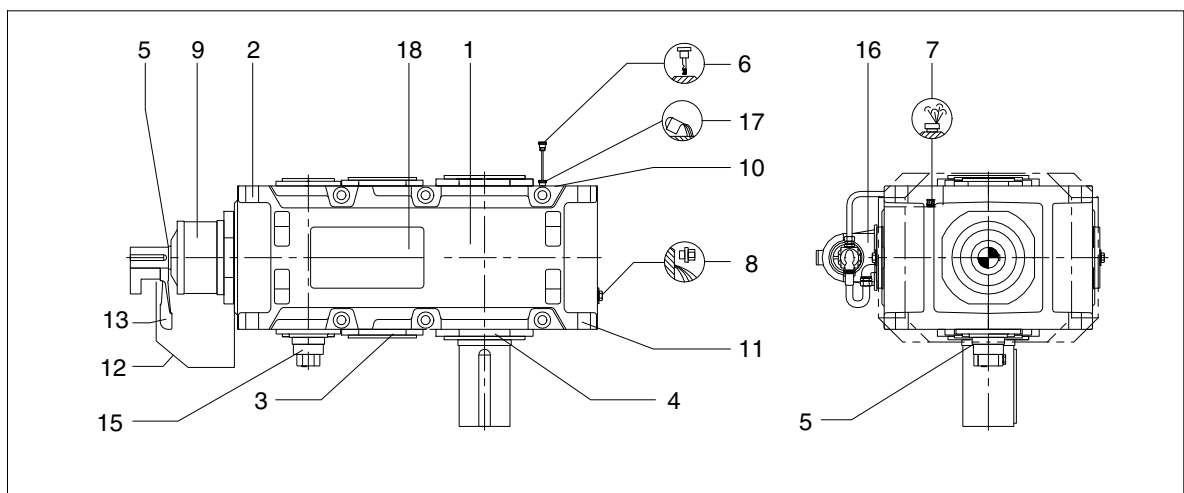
Gear-unit features on gear units type H..V ≤ 12
